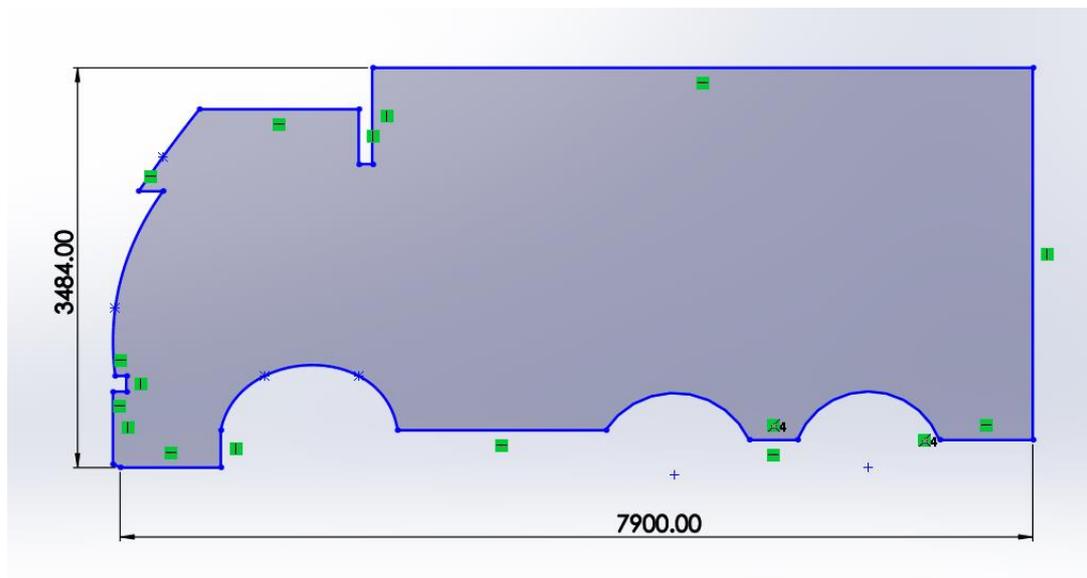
SOLIDWORKS drawing of a heavy vehicle in millimeters.
